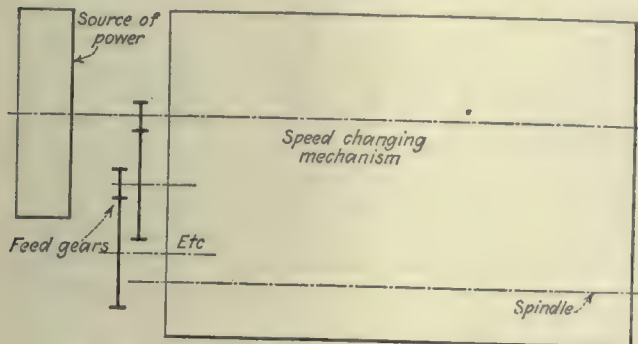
DIAGRAM SHOWING ARRANGEMENT OF MILLING MACHINE GEARING
